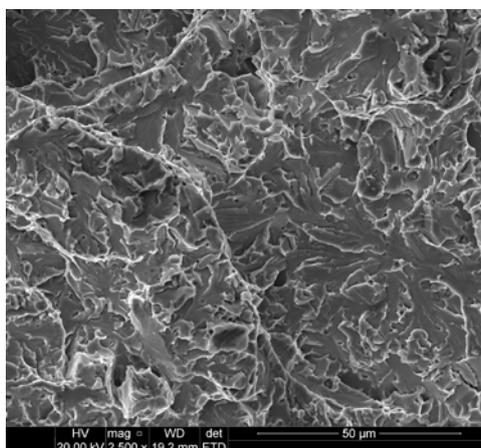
Image of the fracture surface of FCAW weld metal.
